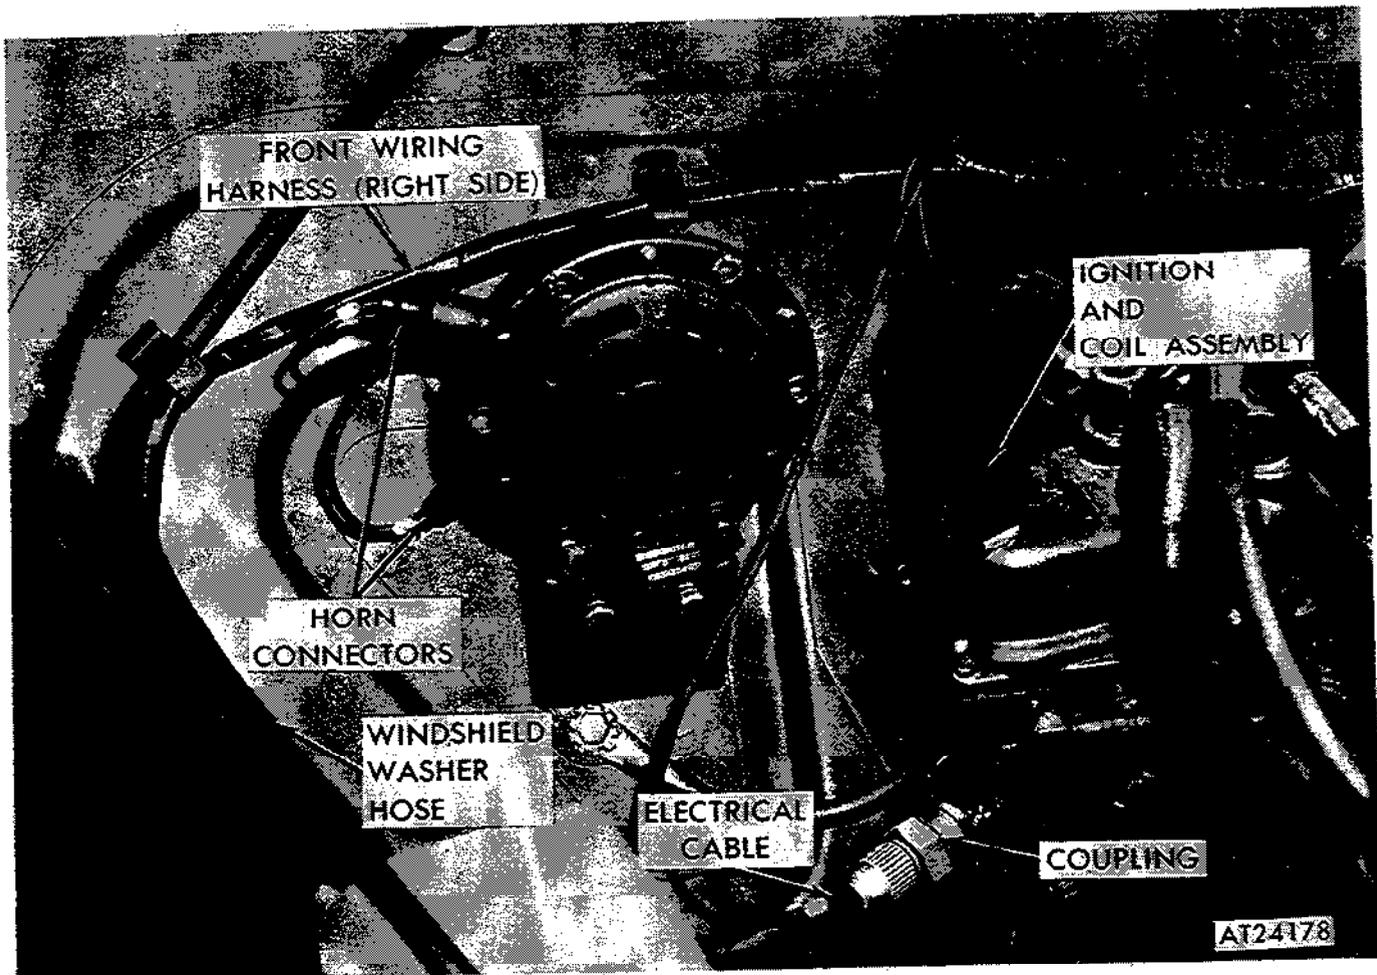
Removing or installing right side of front harness assembly on M151A2, M825, and M718A1 vehicles.
